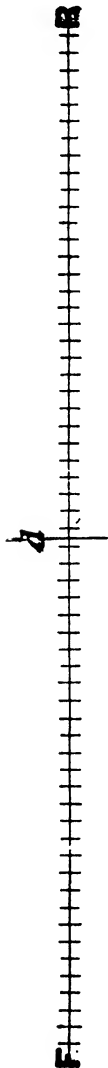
,725.—Rivet centers as spaced in the lower circumferential rivet seam.
